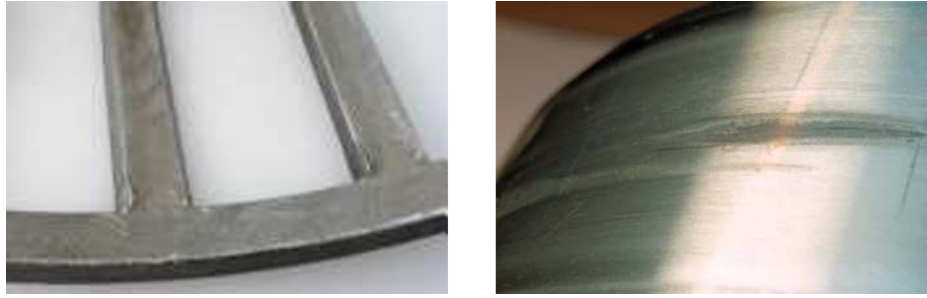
Example of abrasive wear on a steel cage of a tapered bearing (on the left) and adhesive wear on the outer inner ring raceway of a cylindrical roller bearing (on the right) [6].
